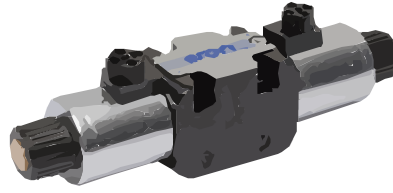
3D CAD drawing of an electro valve produced and assembled by Brevini Fluid Power (Power, B. 2016).
